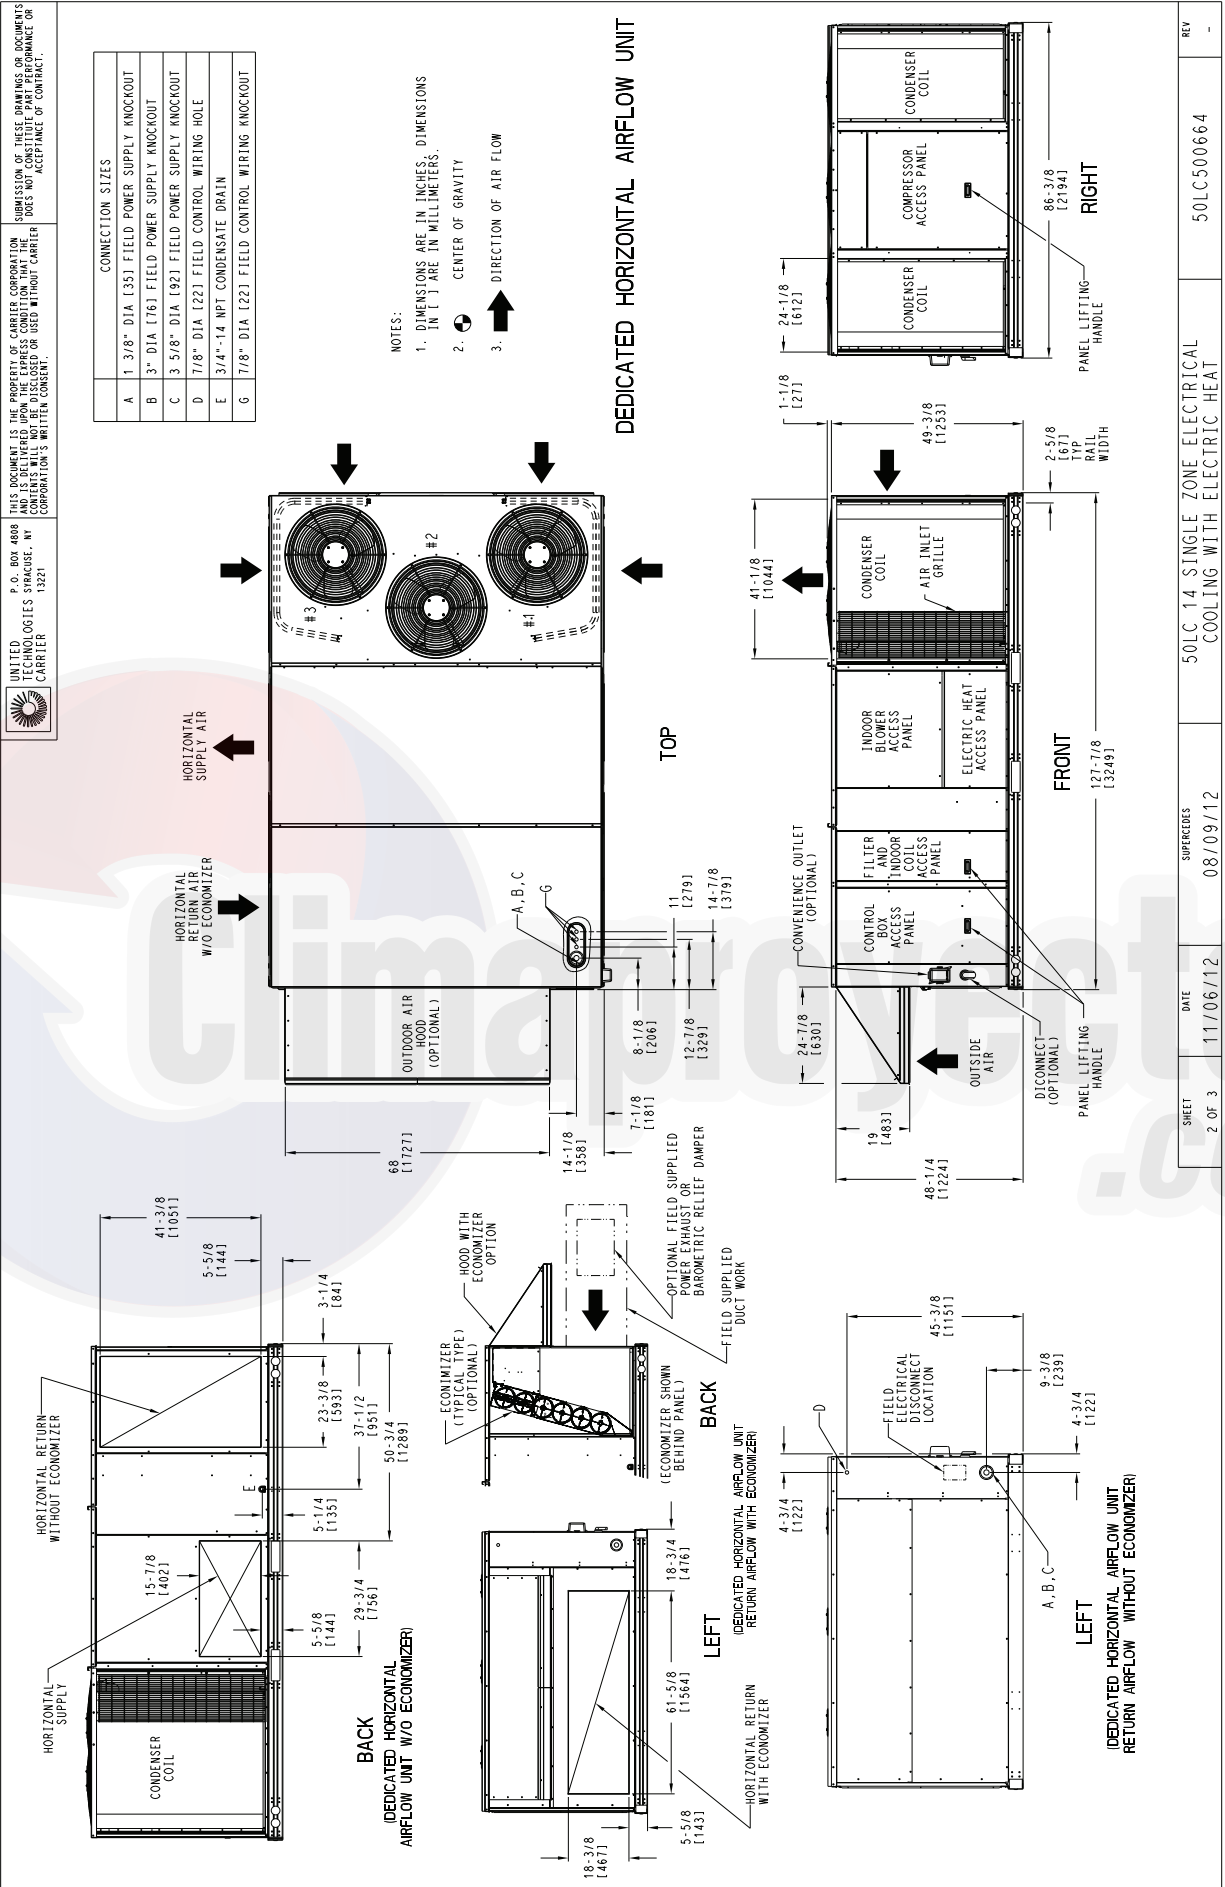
(cont.) - Unit Dimensional Drawing - 14 Size Unit, Sheet 2 of 3
